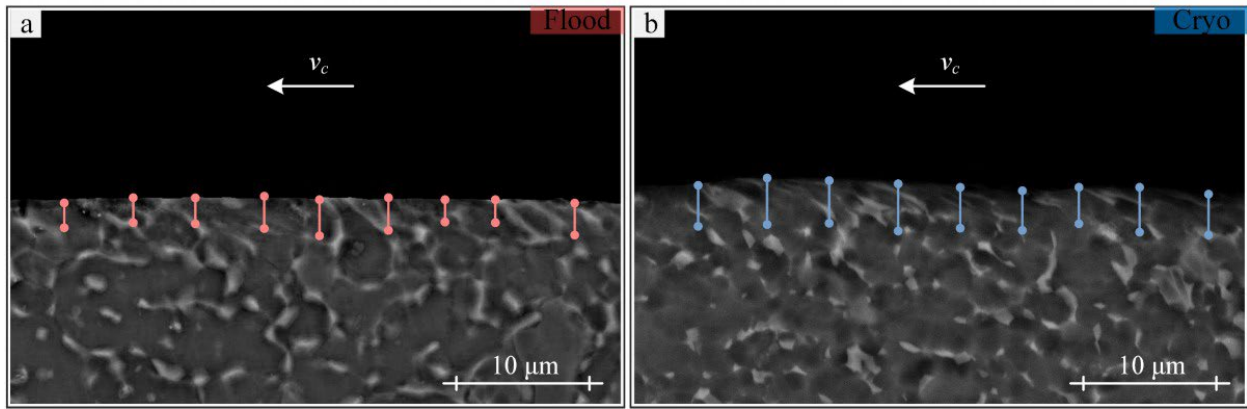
Microstructure below the machined surface and highlight of SPD layer below the surface of the flood (a) and cryogenic (b) machined specimens.
